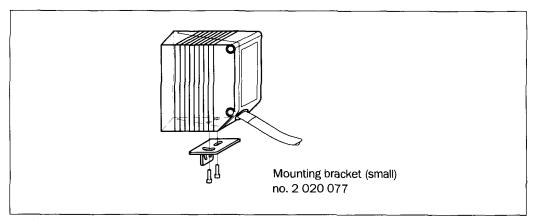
Mounting example: securing the CLV using the mounting bracket (accessory)
